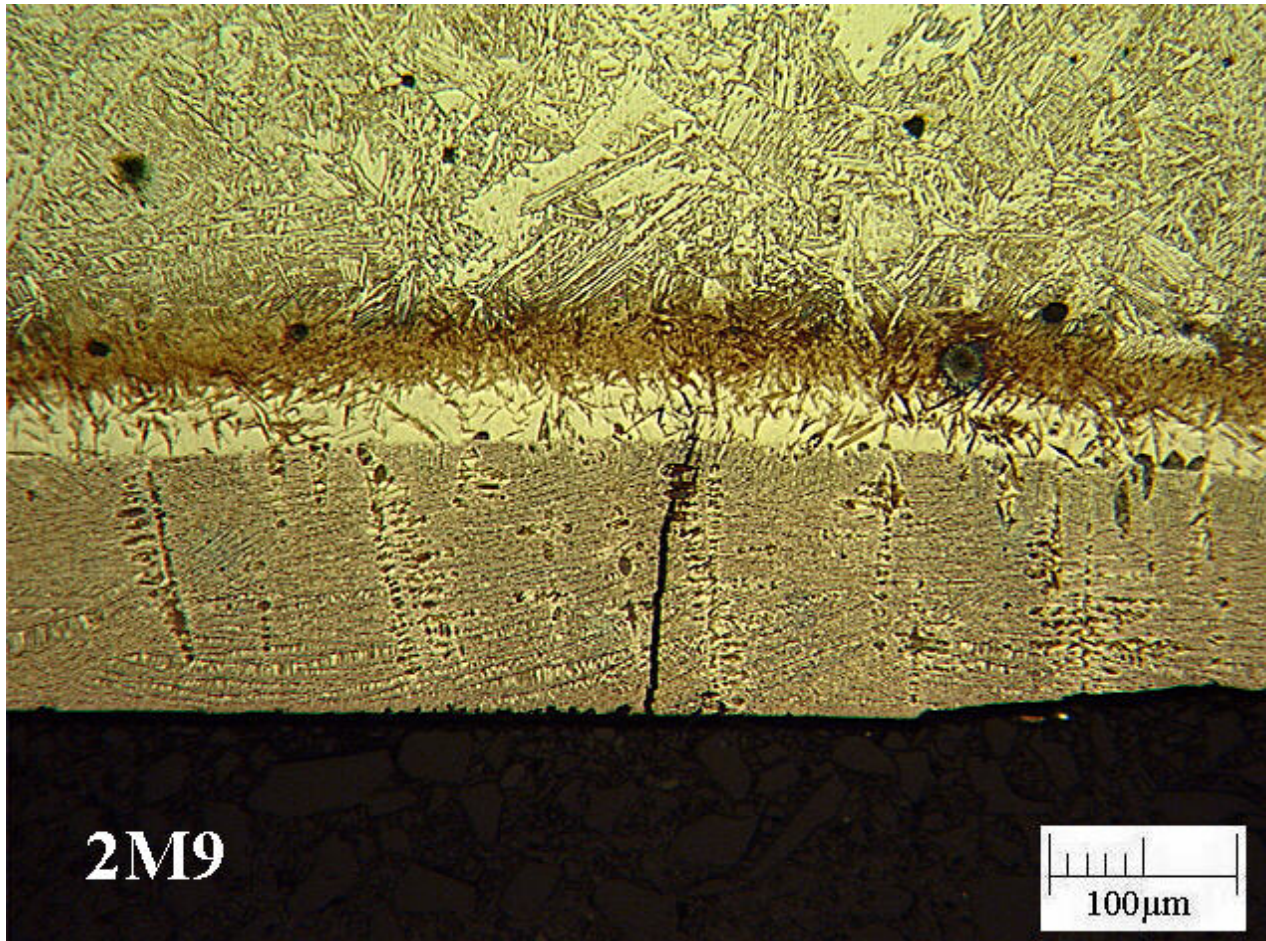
Metallographic Cross Section of Weld 2M9
